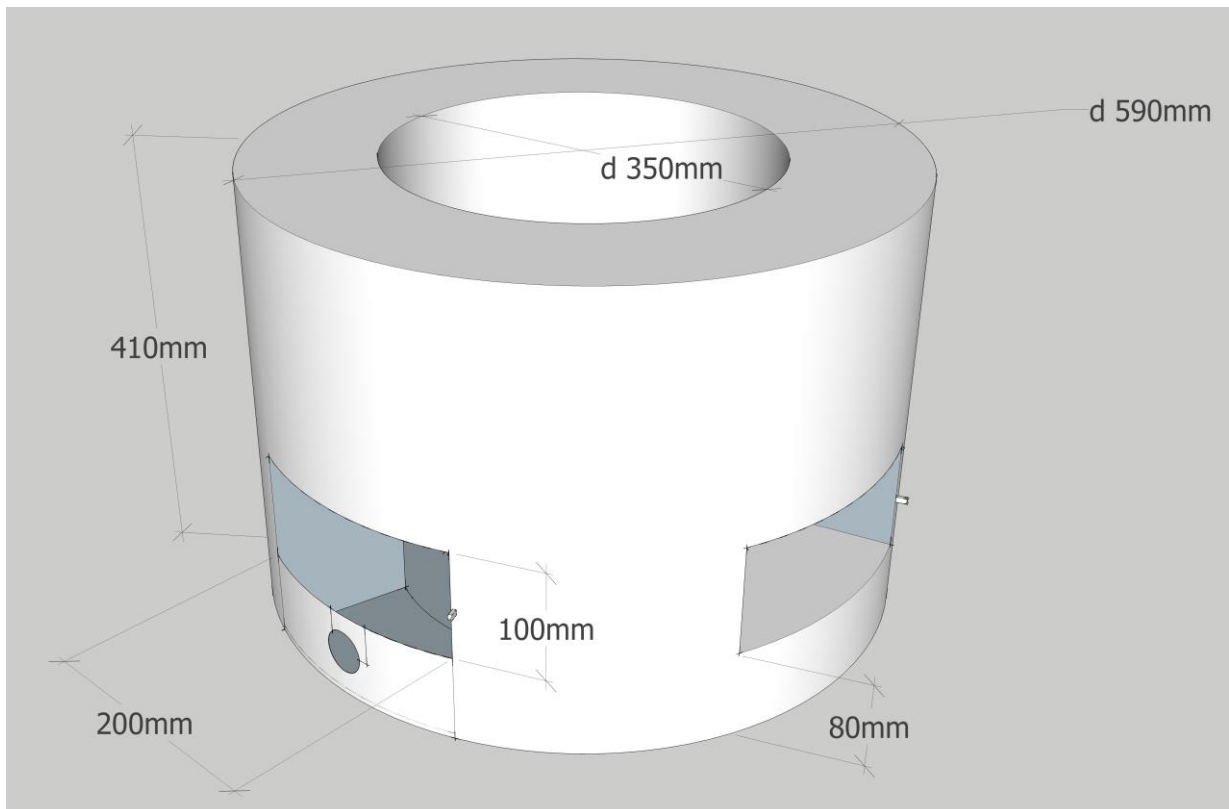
Blueprint with the external dimensions of the furnace (mm)
